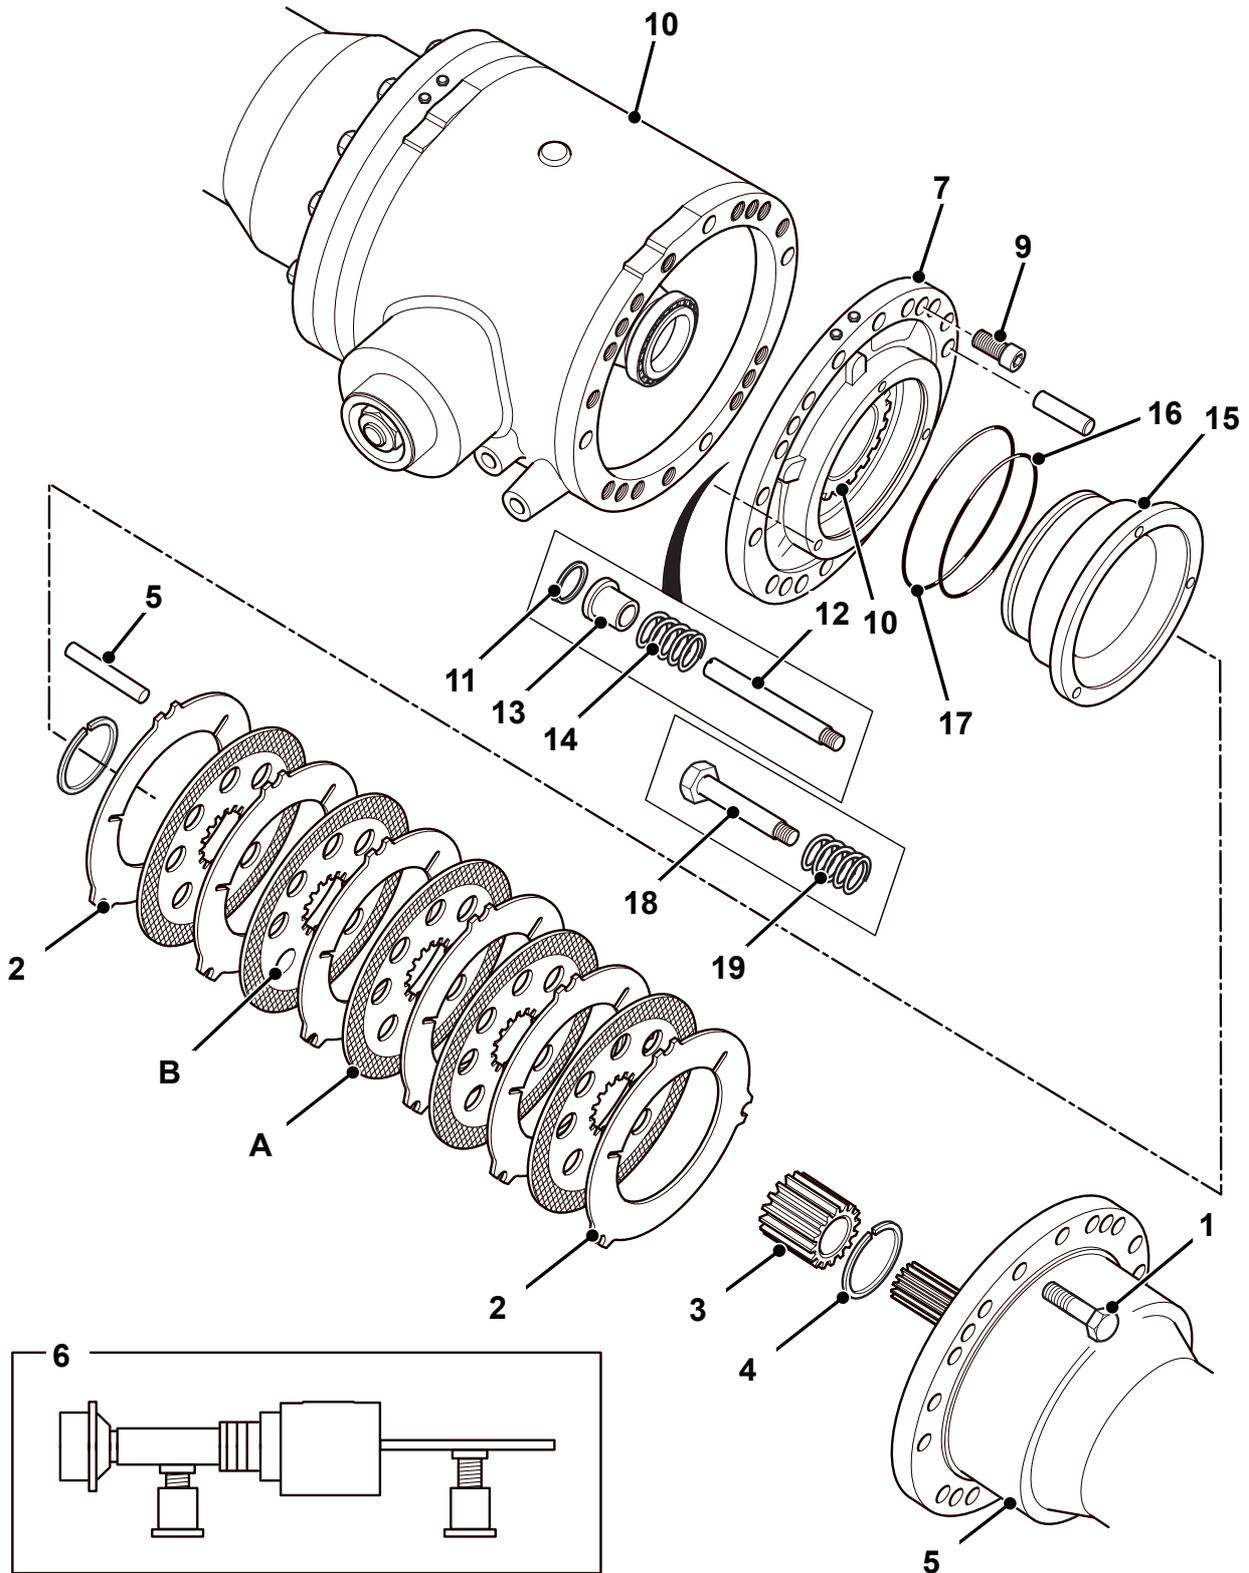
70 Series Integral Brakes - 3 Piece Axles
